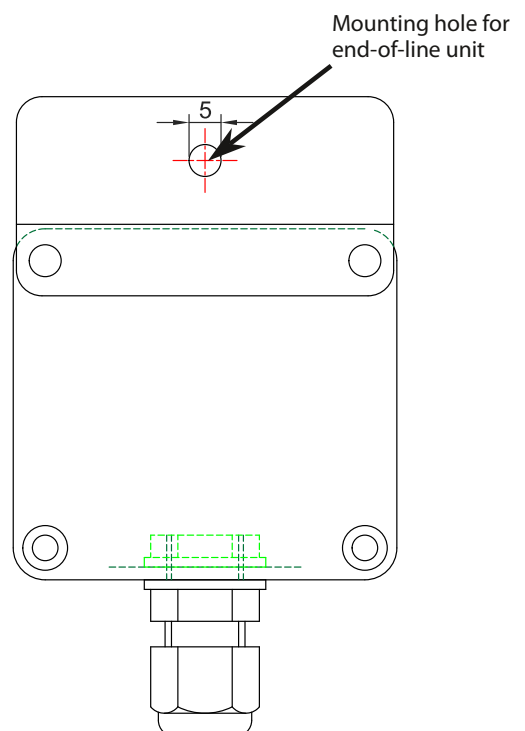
Fixing dimensions for mounting the ProReact EN Analogue End-of-line Unit
